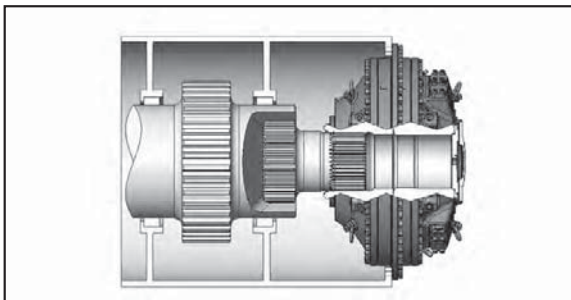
Flange mounted motor with splines and high radial load  $F_r$  on driven shaft.
